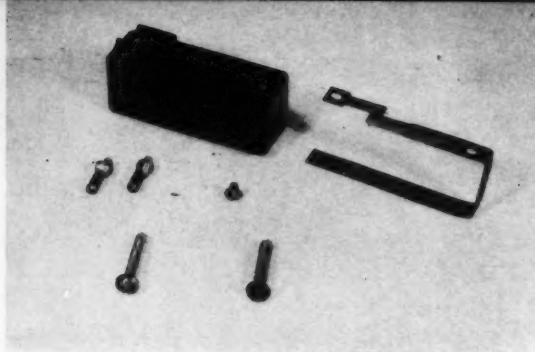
illustrates the necessary parts for the Graflex synchronizer before their final assembly.
